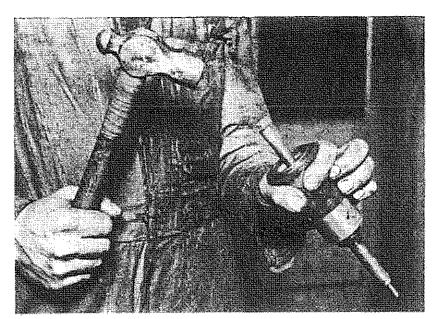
Removing Thrust Assembly From Gear Hub.
